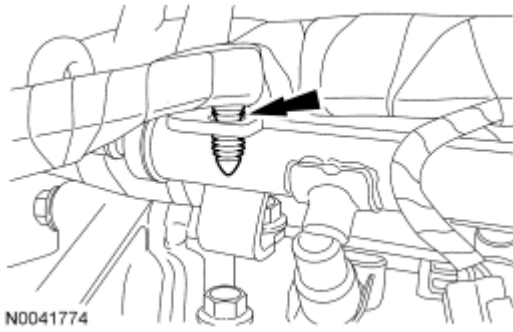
Locating Fuel Rail Wiring Harness Retainer
